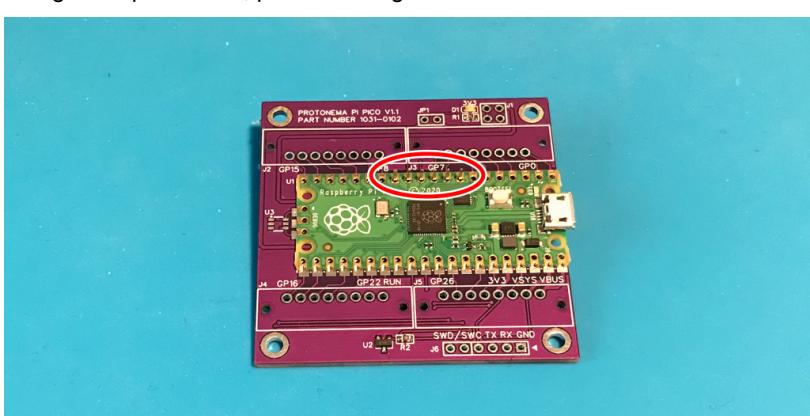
Pi Pico module aligned on the 1031-0101 PCB.
